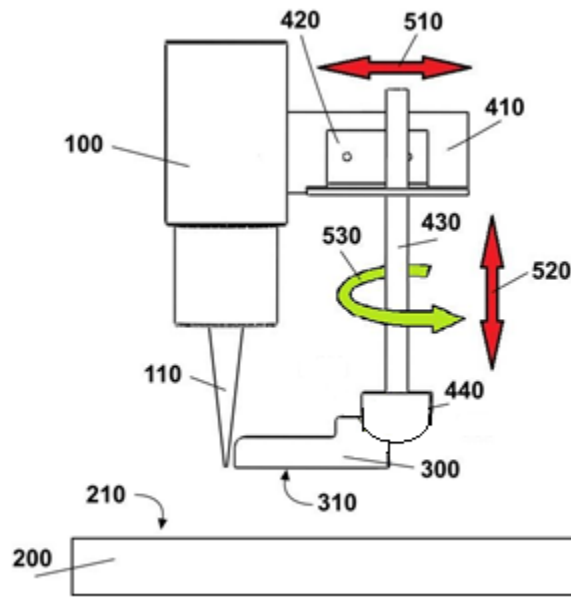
A right side view of the apparatus automated laser welding
